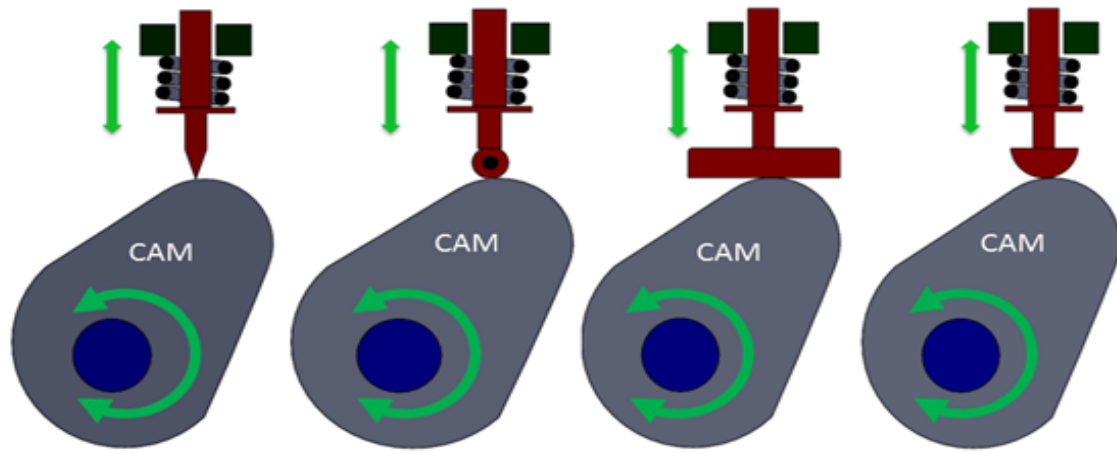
a. Knife-Edge Cam Follower, b. Roller Cam Follower, c. Flat-Faced Cam Follower, d. Spherical Cam Follower
